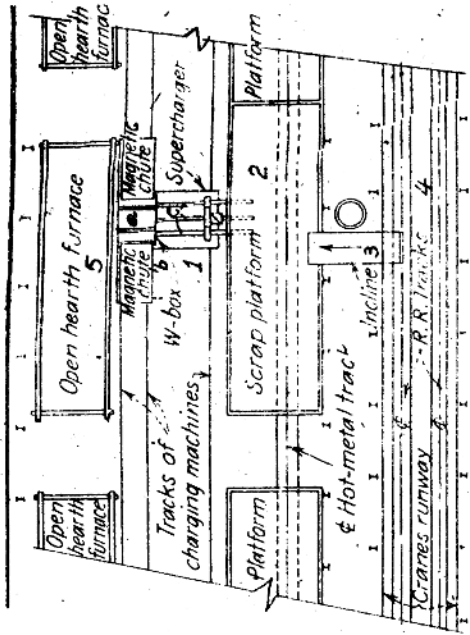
SECTION THROUGH CHARGING FLOOR.
